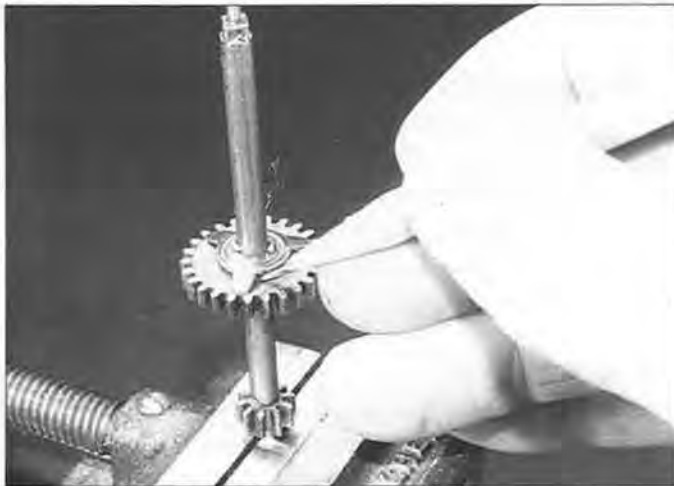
Hand-set friction is adjusted here. Pull the pin, and adjust the spring tips.
